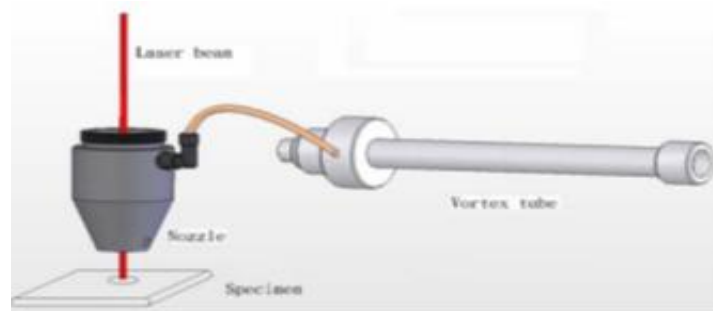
Low temperature air materials processing used by a vortex tube in the machine tool [7]
